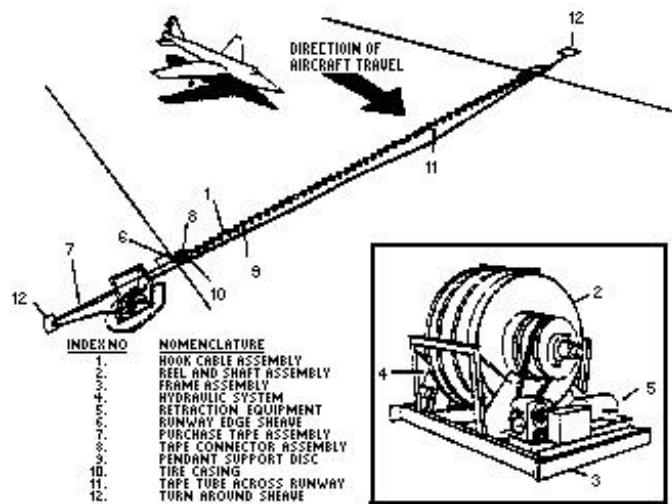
, Runway Overrun Barrier Type MA-1A Modified
